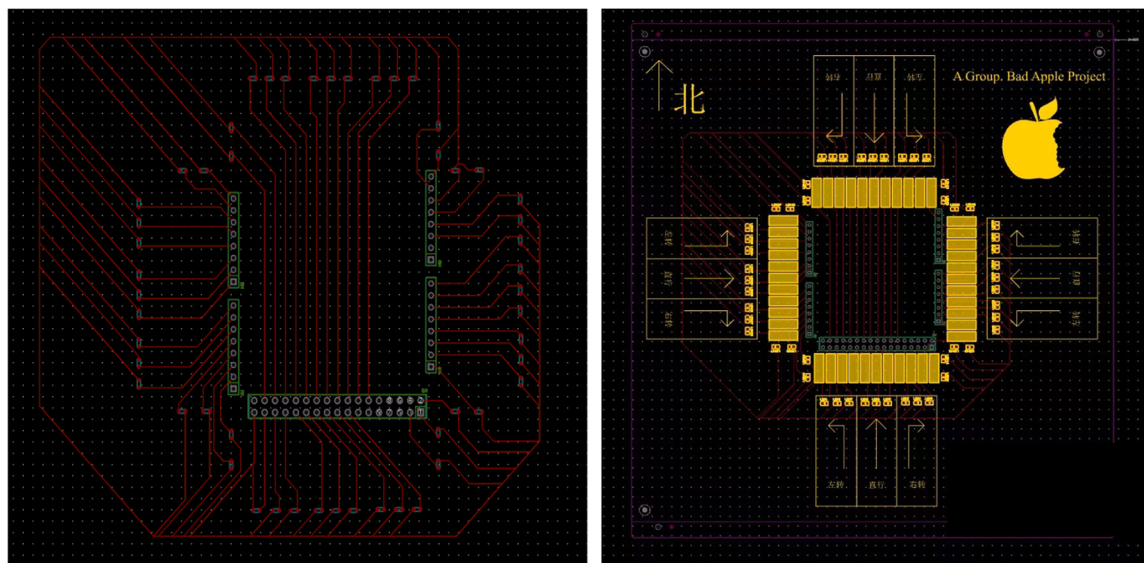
Overall printed circuit board (PCB) circuit layout.
